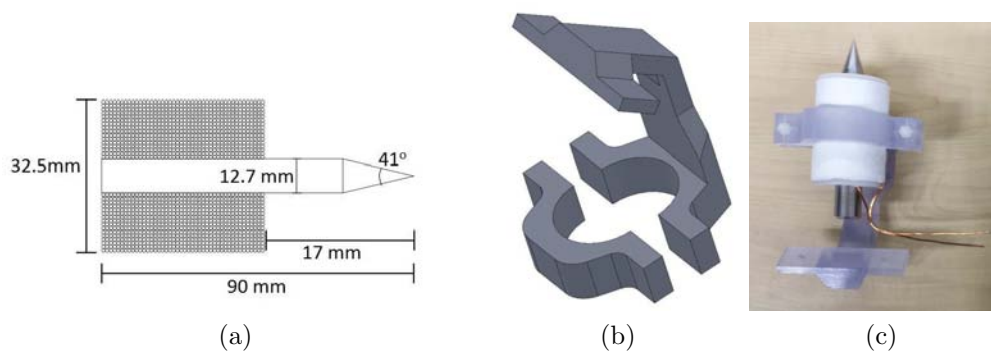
(a) Schematic design of the EMN. (b) CAD model of the EMN holder. (c) Actual image of EMN and holder.
